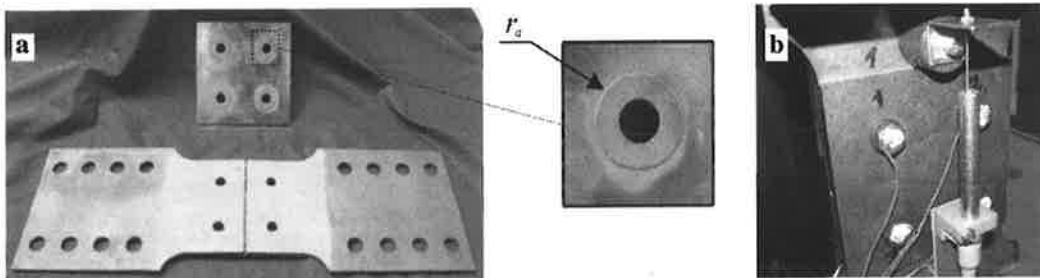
(a) Hybrid specimen before setup with the machining detail and (b) the instrumented specimen attached to a hydraulic testing frame. For bolt through holes,  $\phi = 14.5$  mm.
